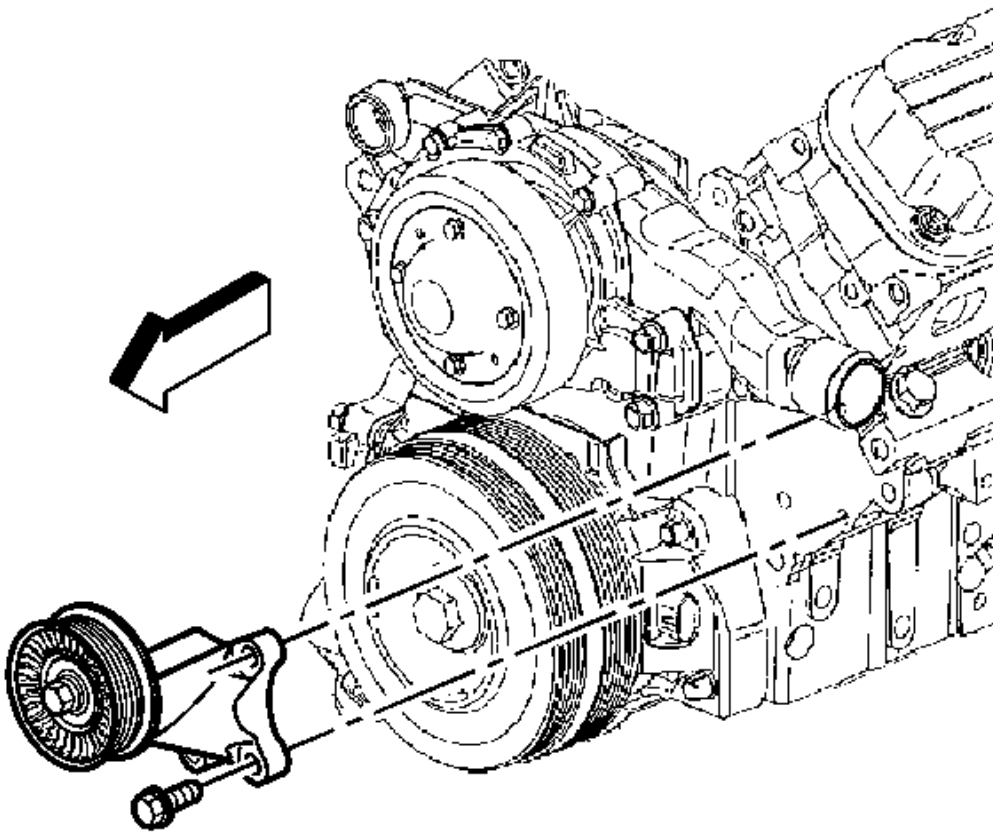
Installing Drive Belt Idler Pulley Bracket (L67)
